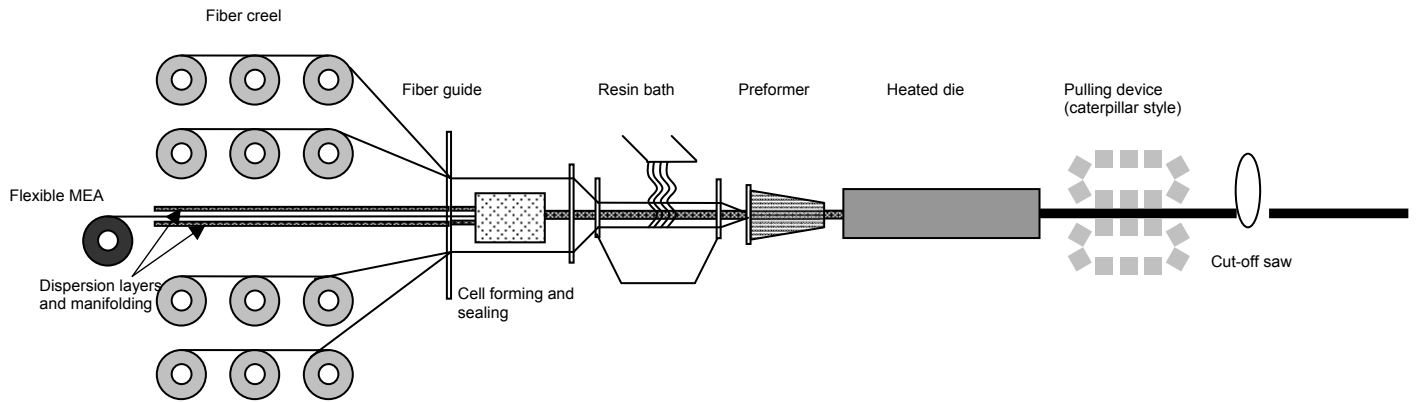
Schematic of pultrusion process with fuel cell assembly.
